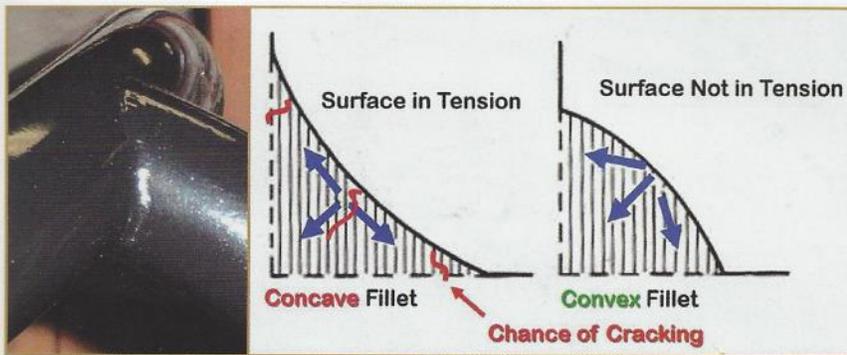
Although a concave fillet has a smooth intersecting angle, when cooling, the weld shrinks and the tension created across can cause cracking. A flat to convex bead is best.
